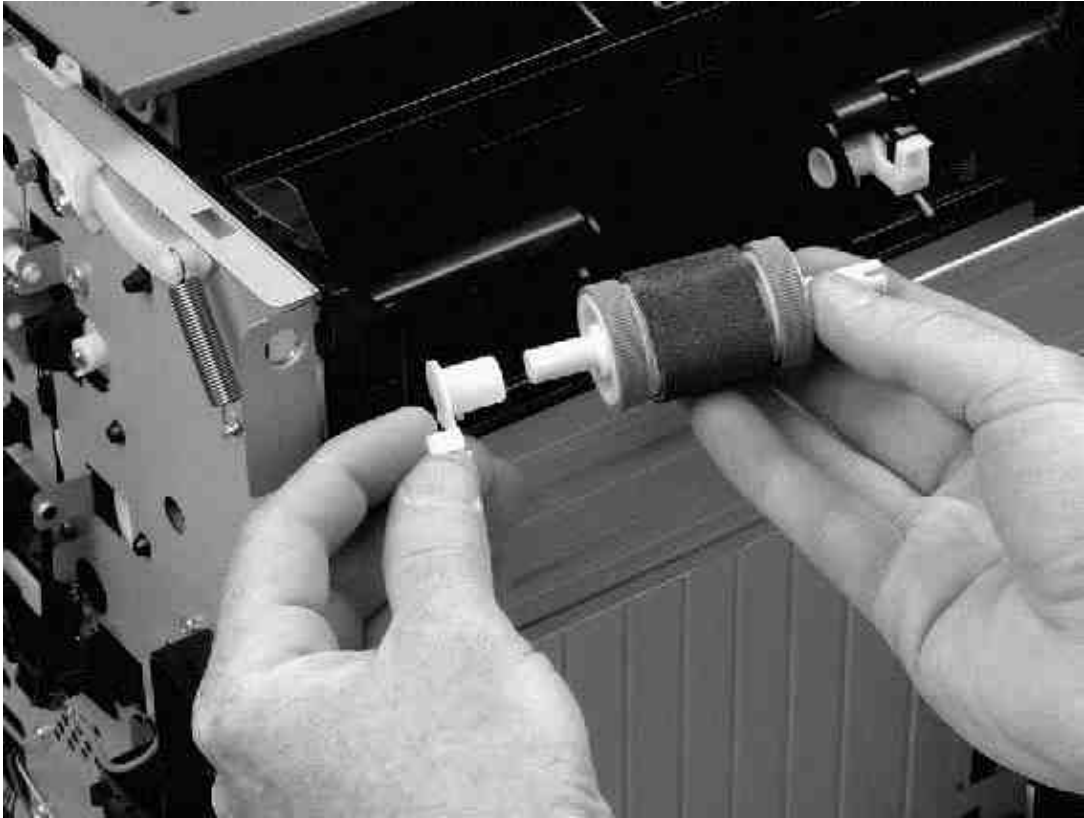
Removing the tray 2 pickup roller (1 of 2)
